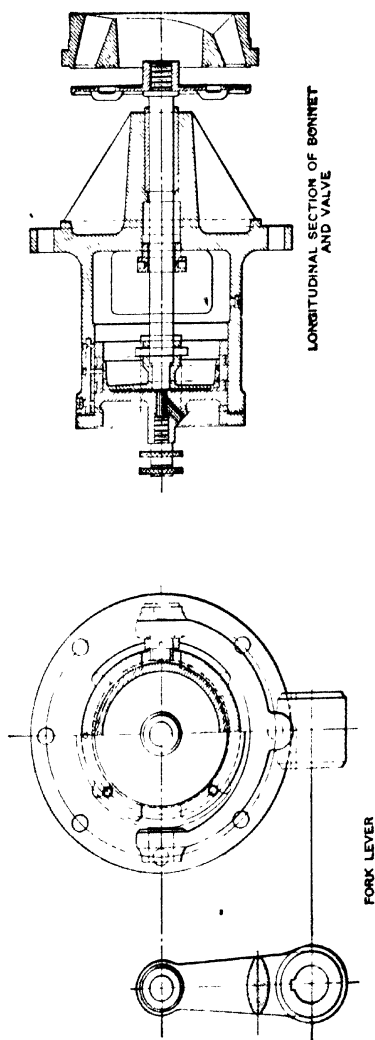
Details of Riedler Discharge Valve (Fig. 78).
